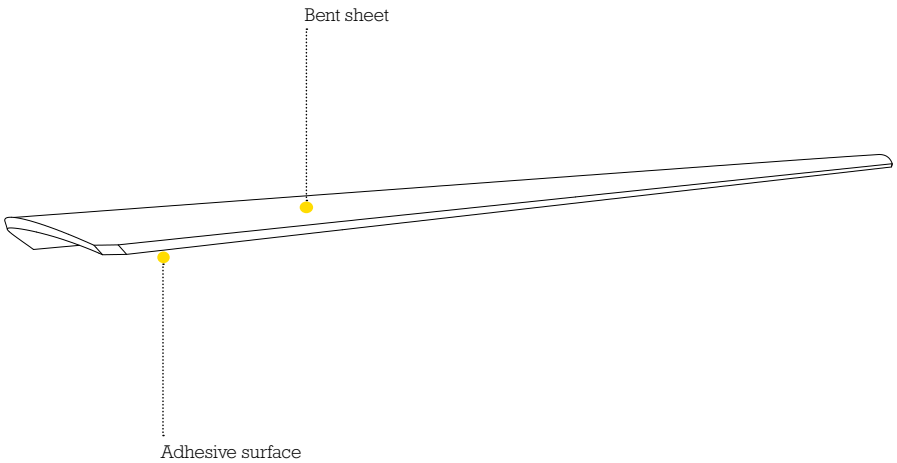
Construction detail - Display elements | Perspective and plan views.
